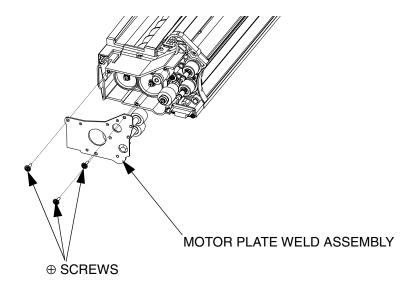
Removal of the Idler Gear (Z20) Assembly
